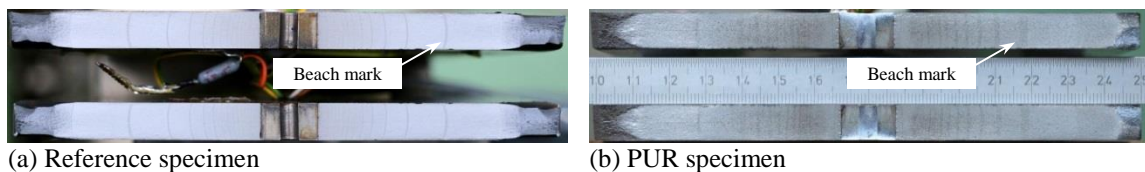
Cross-sectional view of the failed steel plate specimens and beach marks.
